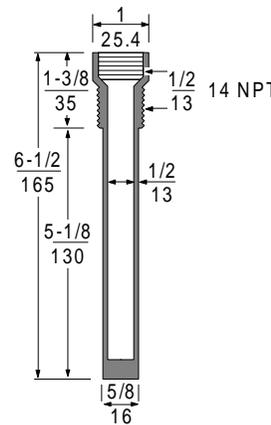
WZ-1000-4 Immersion Well Dimensions (in./mm)
